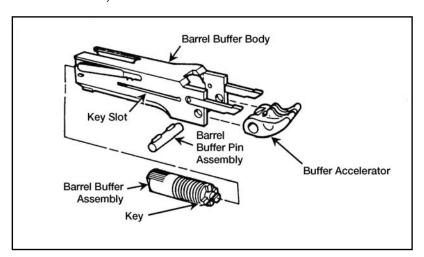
Assembly of the barrel buffer assembly
